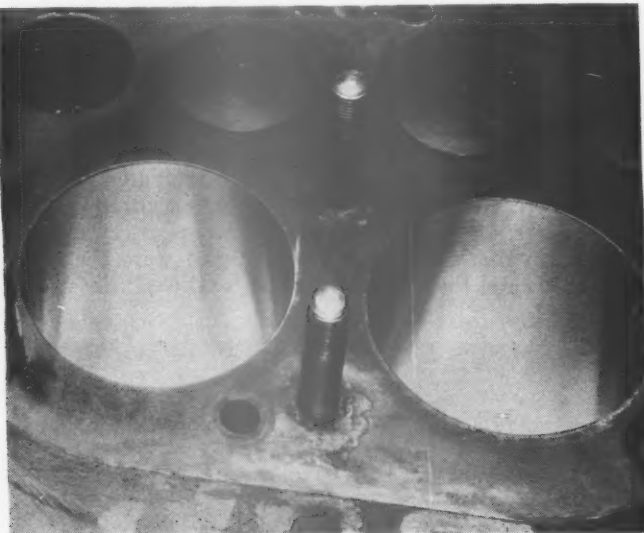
Cylinder finished by wet-grinding with a 36-grain wheel, before service
